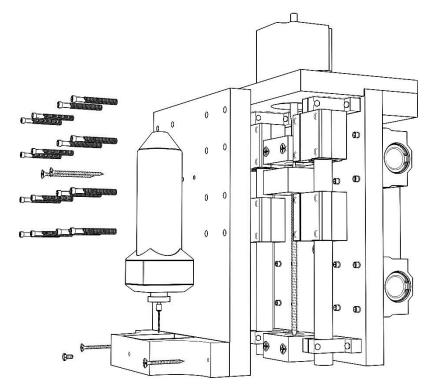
(ADDING AND MOUNTING THE Z AXIS BOARD, THE SPINDLE SUPPORT AND THE SPINDLE)
